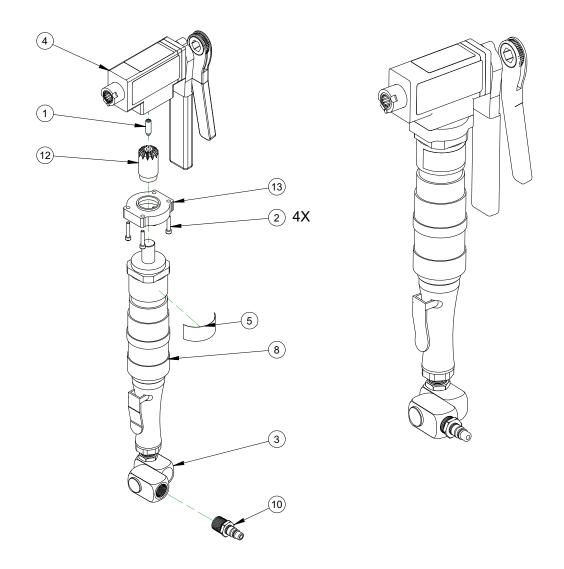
BG22 Boiler Gun assembly (P/N 99871)
